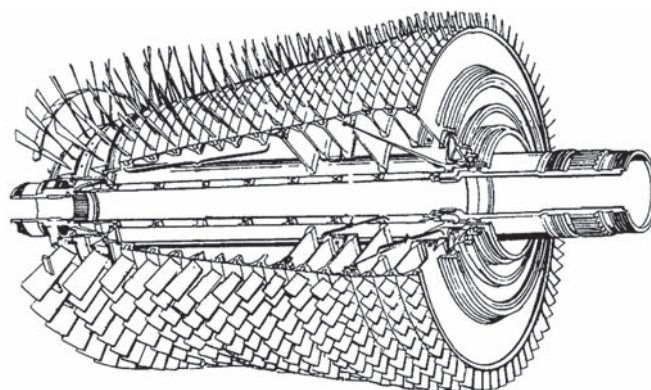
Cross-section of LM 2500 engine's compressor rotor .
